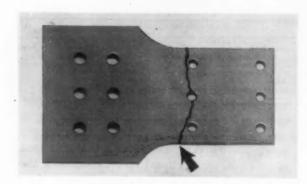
The plates shown here in a special joint which were bolted only at the four corners. Failure of the joint occurred in the center of the plate with the crack starting at an open center hole.
